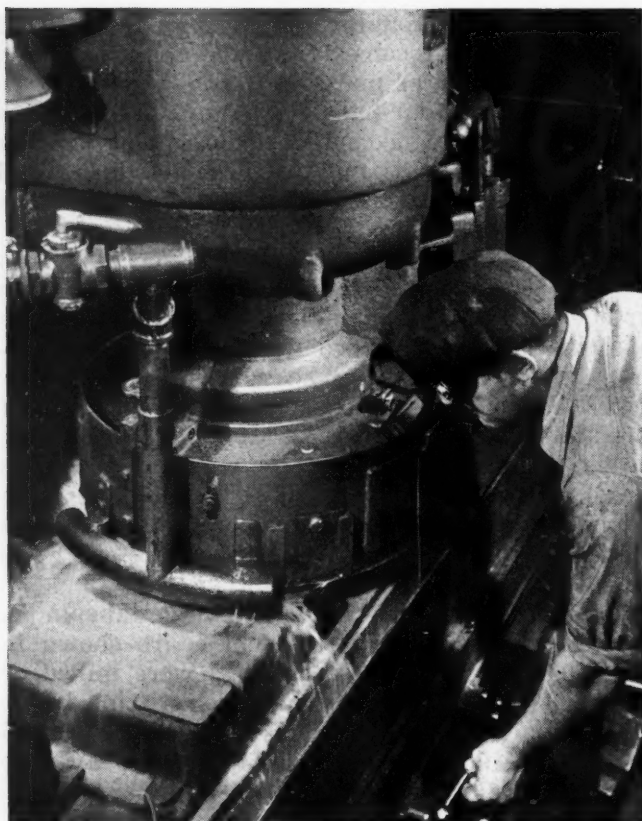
A Reciprocating-table Machine Grinding Large Rough Castings as They Come from the Foundry
